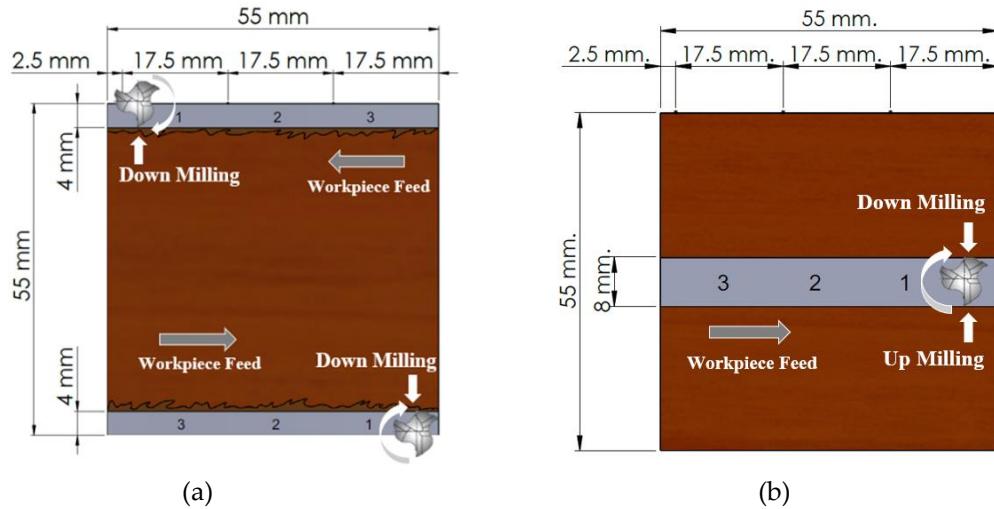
Milling processes: (a) side milling and (b) slot milling [12]
